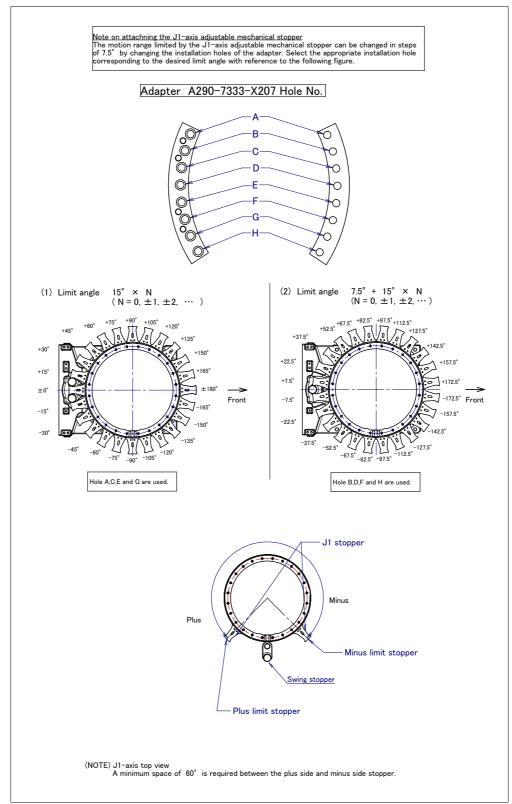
(c) Mounting the J1-axis adjustable mechanical stopper (2/2)
